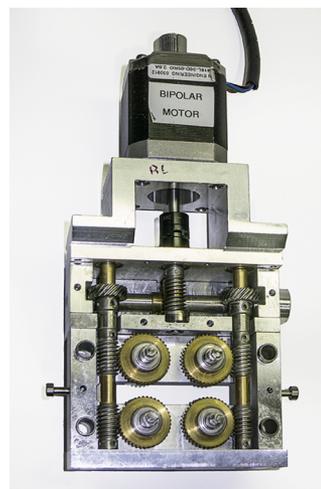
Open view of HPCAT gearbox for room and high temperature experiments.
